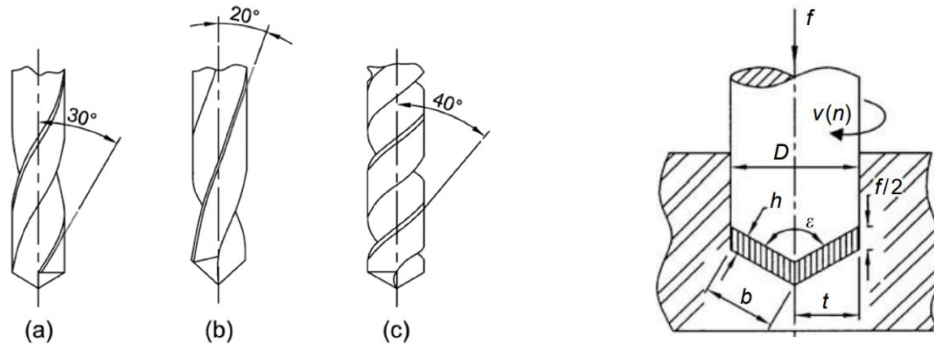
Helix drills of different helix angles: (a) standard, (b) slow, (c) quick and basic machining parameters in drilling [14]
